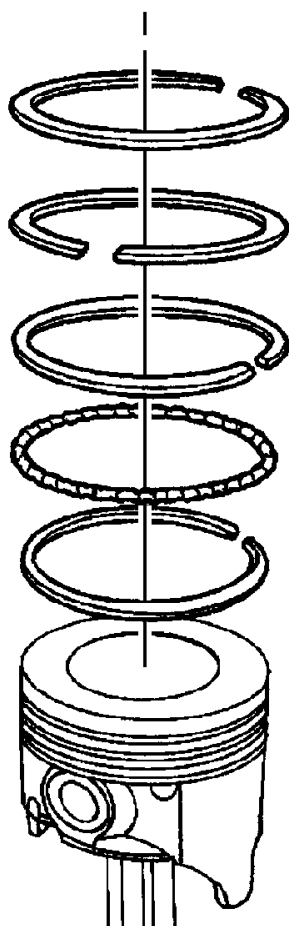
View Of Piston Oil Rings, 2nd Compression Ring And Top Compression Ring
